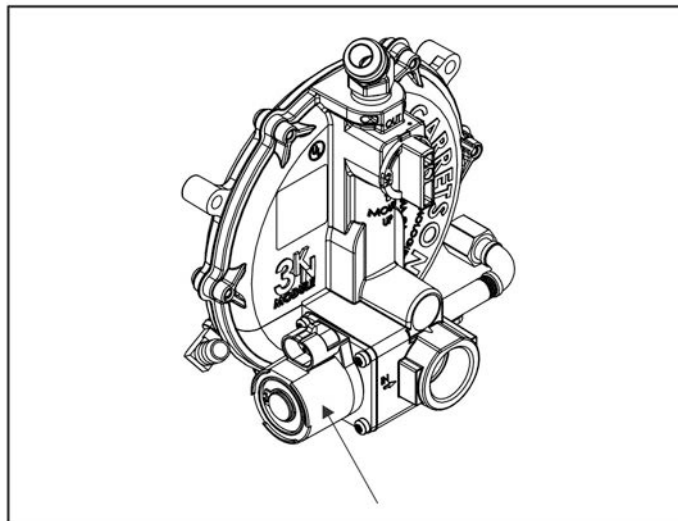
FUEL SHUTOFF SOLENOID VALVE
